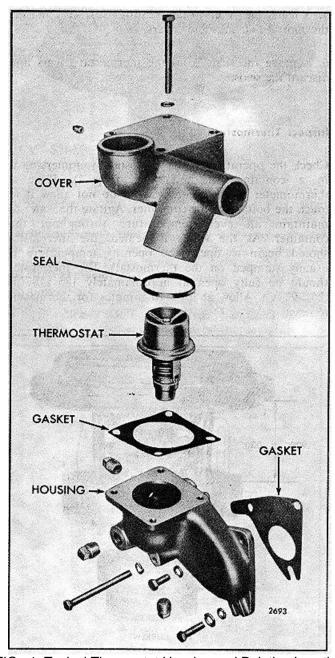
Typical Thermostat Housing and Relative Location of Parts
